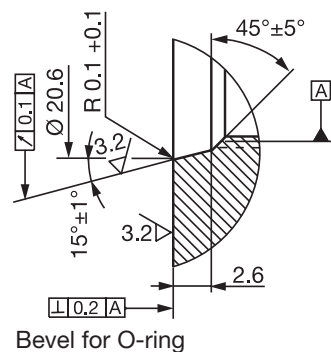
Threaded hole for mounting the BTL with O-ring
